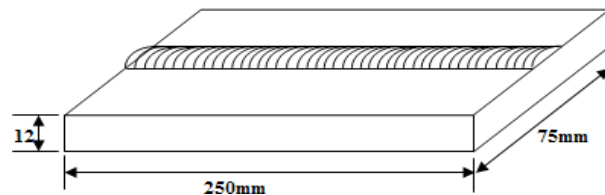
Mild Steel Used to Carry out Welding
